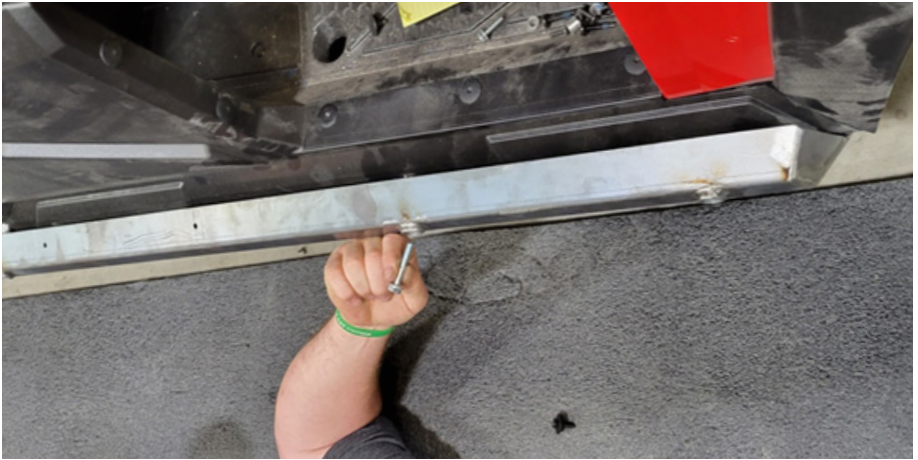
Loosely fasten Nerf Rail using 13mm Socket and 13mm Wrench.
